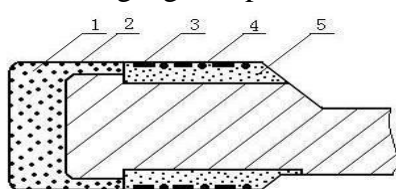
The gauge structure formed by two step method: 1–cutting layer; 2–high strength single crystal; 3–polycrystalline; 4–natural diamond; 5–gauge protection
